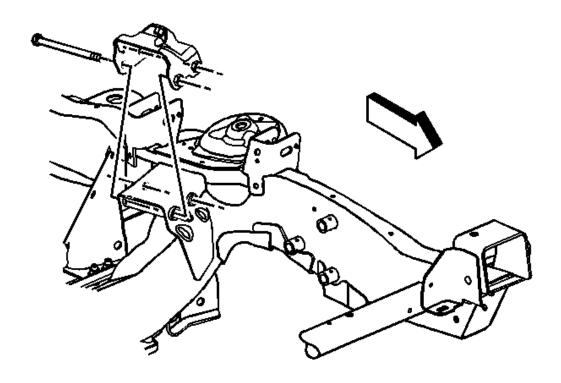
View Of Engine Mount Bracket & Bolts Courtesy of GENERAL MOTORS CORP.
